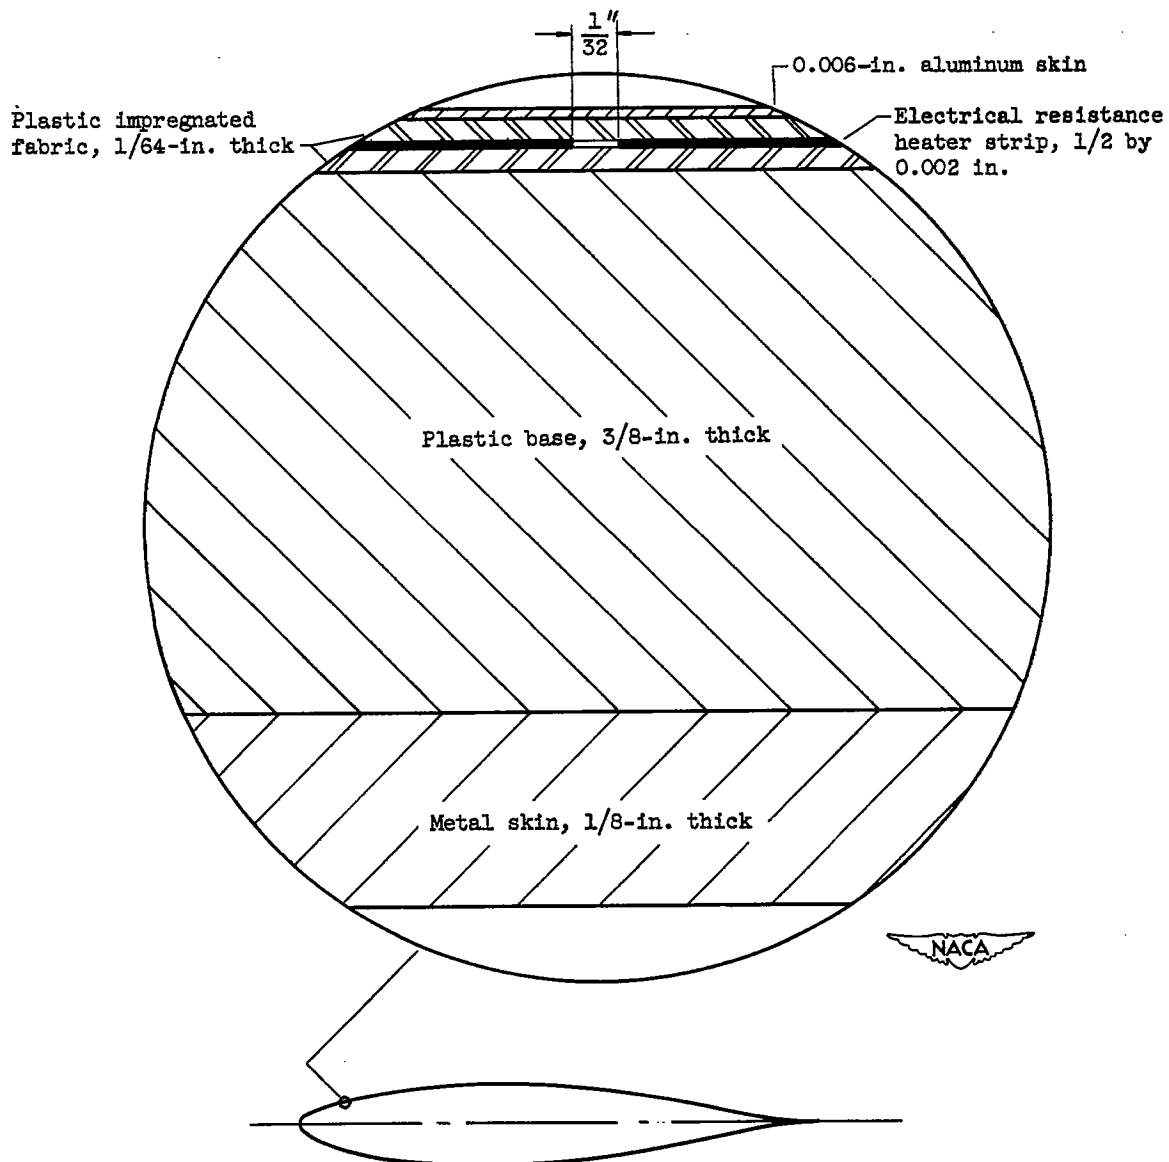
Schematic diagram showing construction details of test section of NACA 65,2-016 electrically heated airfoil model.
